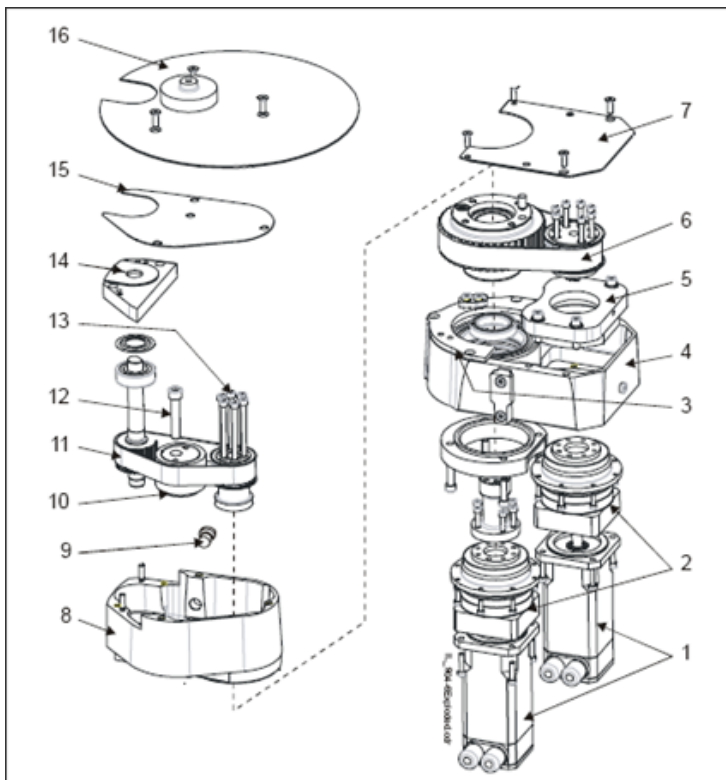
FlexPusher Upper and Lower Housings - Exploded View
